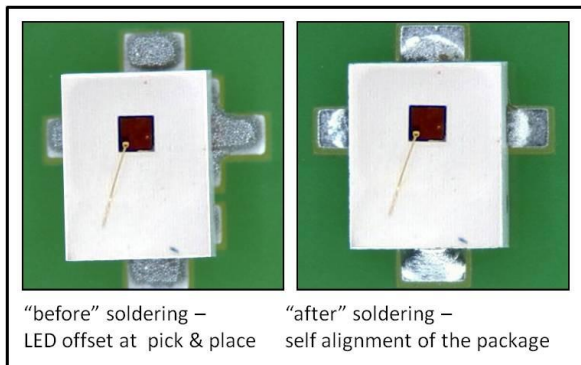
Self alignment of the SYNIOS P2720 during soldering
